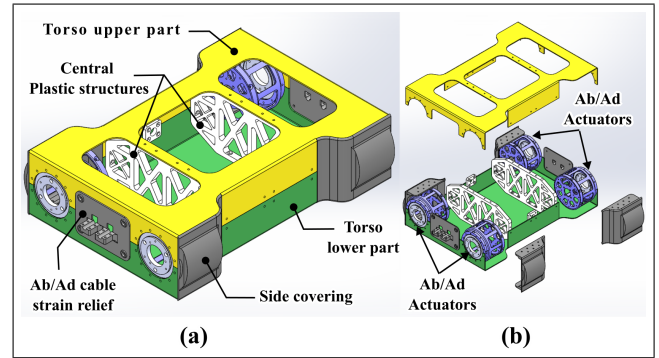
Torso Diagram: (a) Details of Torso design (b) Exploded view of Torso
